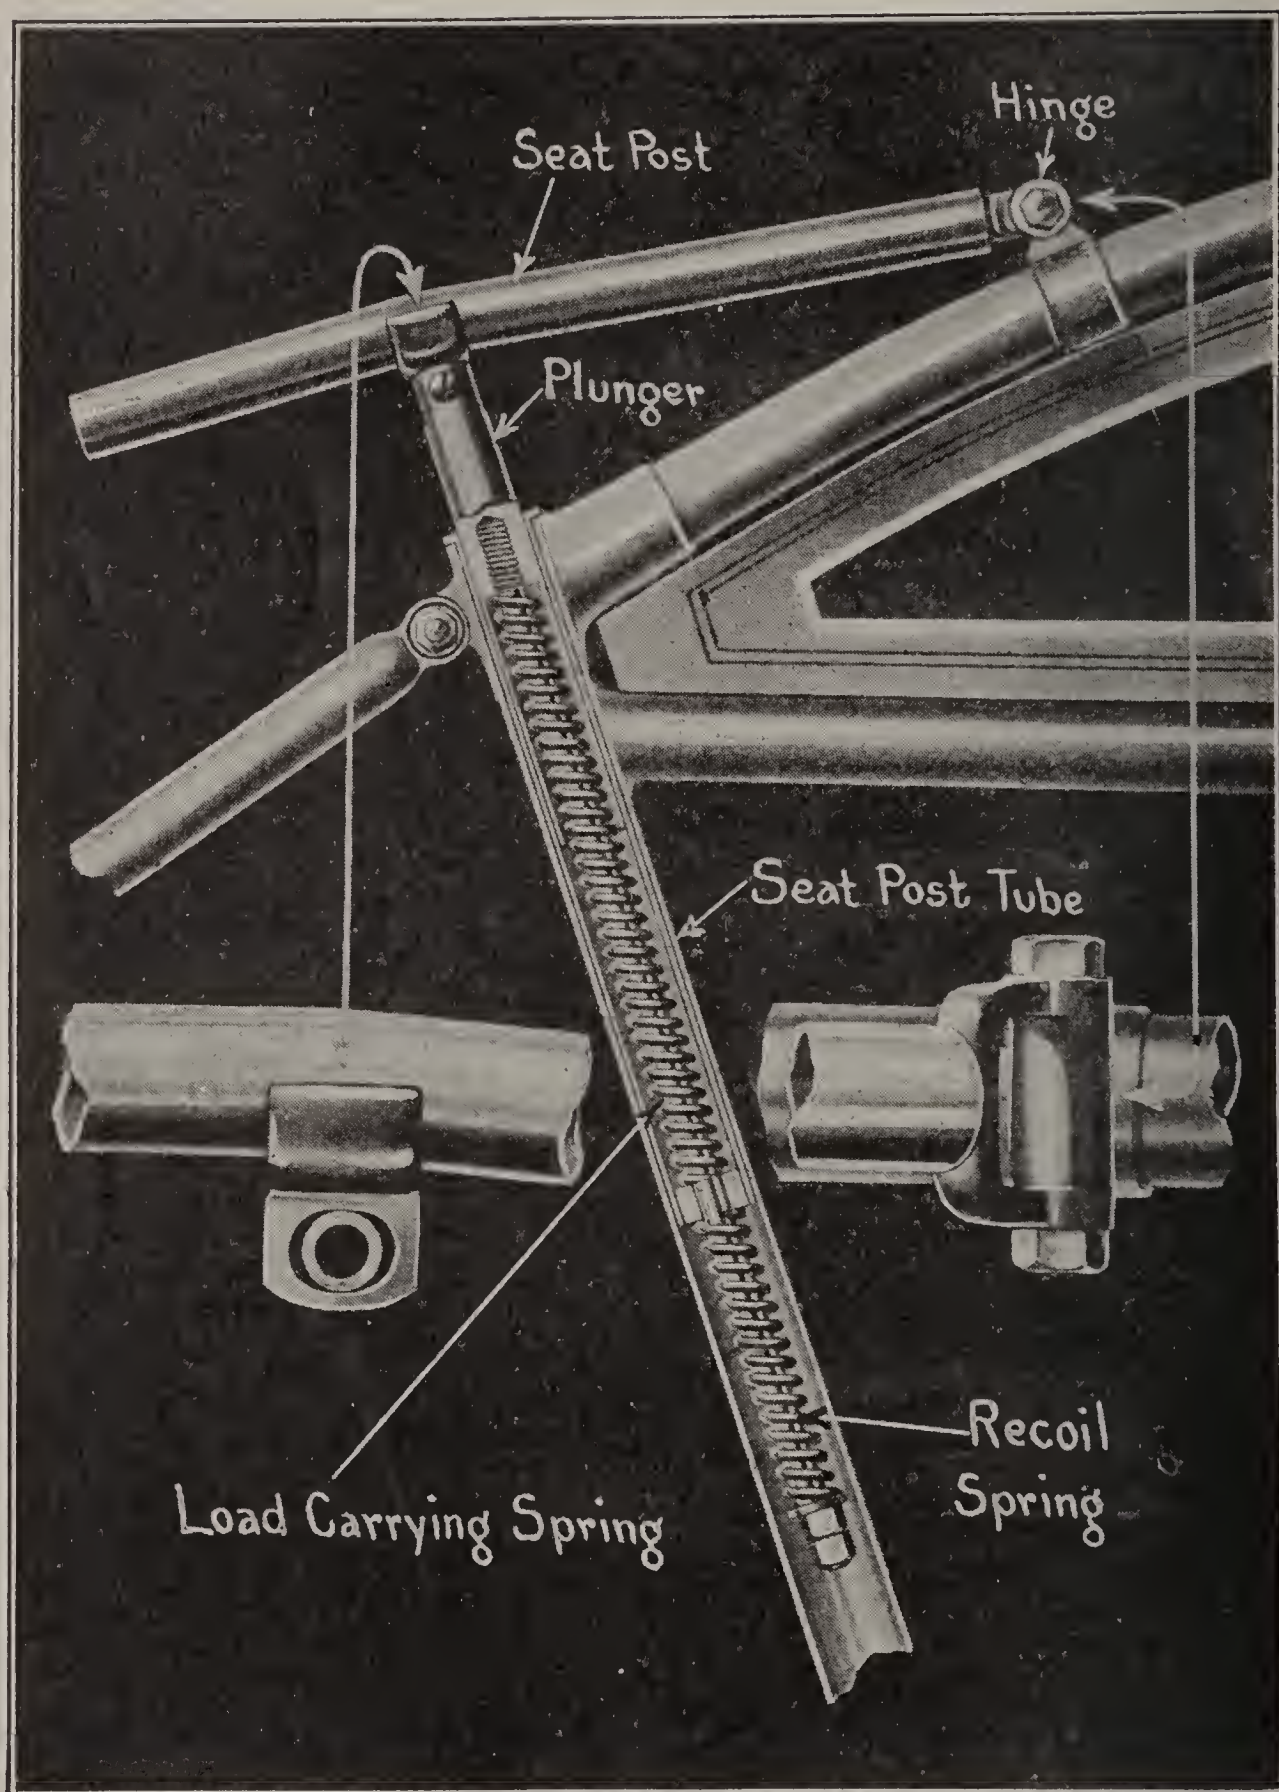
Spring Seat Post Used on Eagle Motorcycle.
